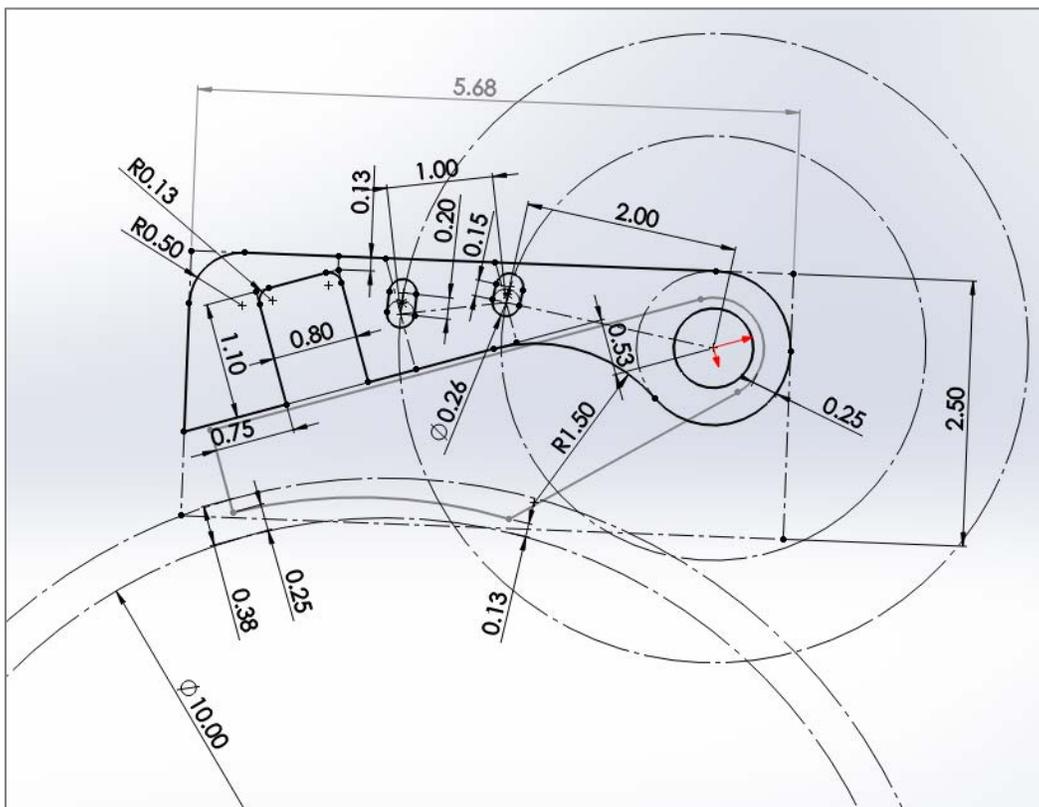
The dimensions used to model the inside housing part in Solidworks. This part was mirrored to make the other half of the inside housing.
